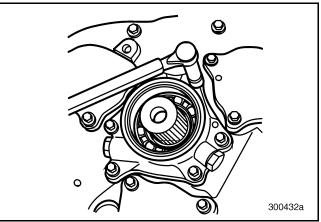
Installing Rear Mainshaft Bearing Cover Assembly and Tightening Capscrews (T313LR/T318LR Shown)
